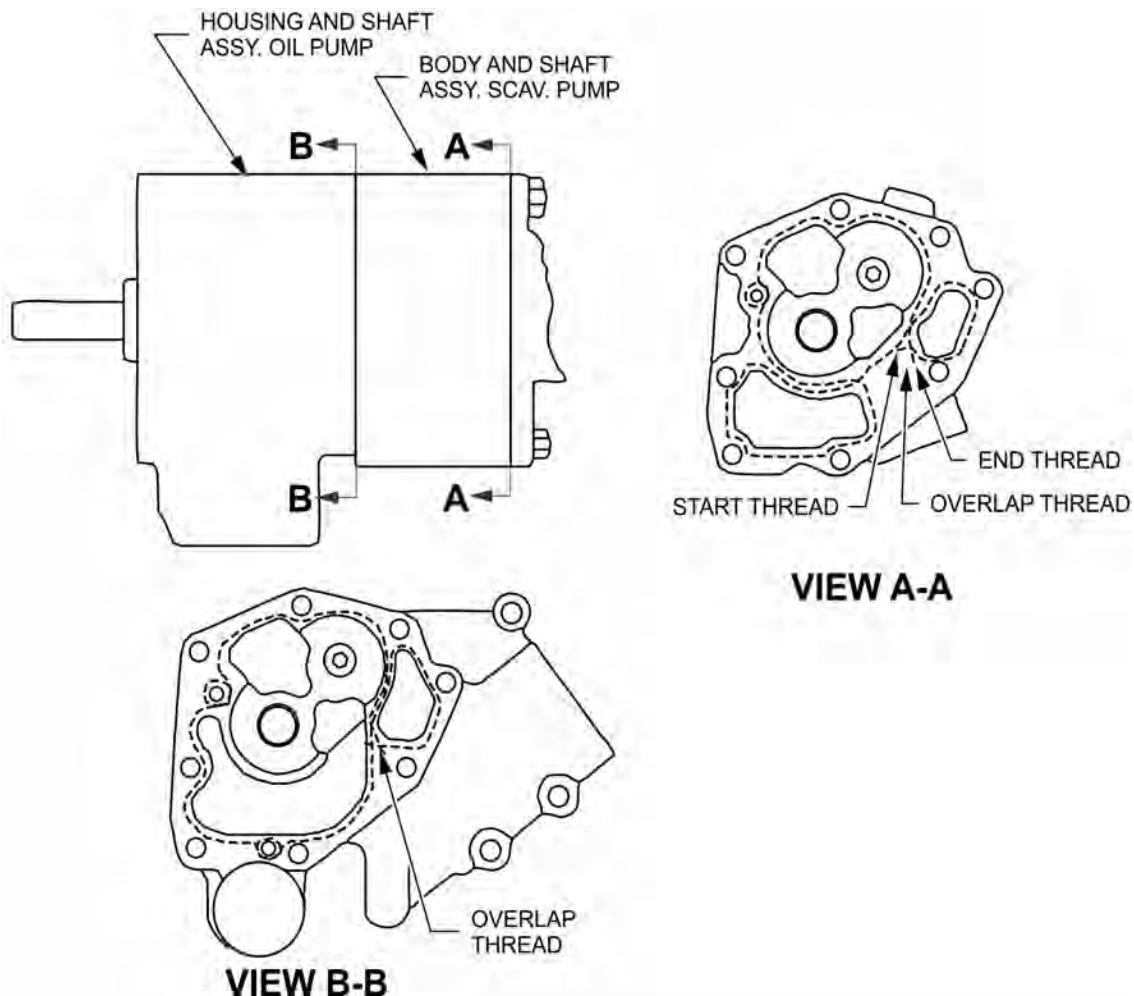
Threading Diagram, Oil Pump Assembly 632623
